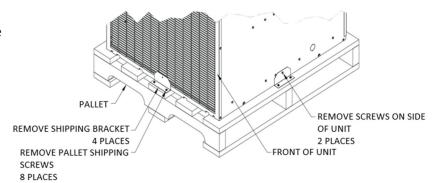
Standard Packaging with Shipping Brackets - Front View
